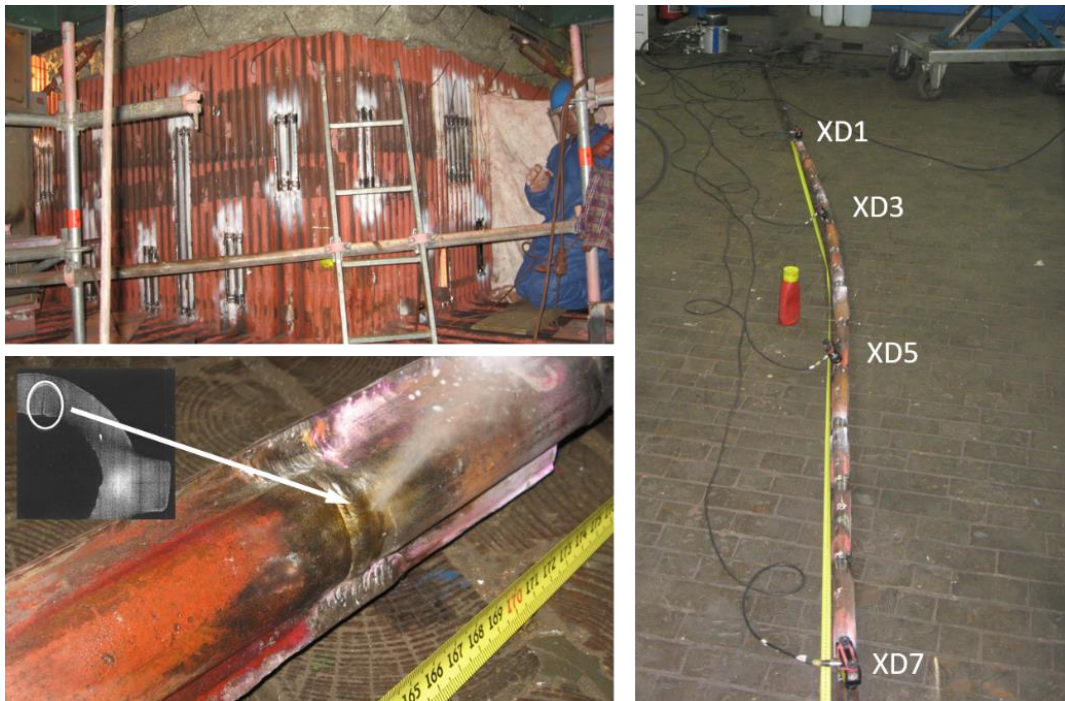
A section of the boiler (top left) with welded repair parts in replacement for cut-outs in the membrane walls; the test object (right) on the floor of the work shop consisting of several cracked parts joined by welding and equipped with four sensors VS150-RIC labelled as XD1, XD3, XD5 and XD7; close-up of test object (bottom left) after failure at 788 bar in leak-before-break mode around 169 cm away from the origin of the x-axis (near to XD1).
